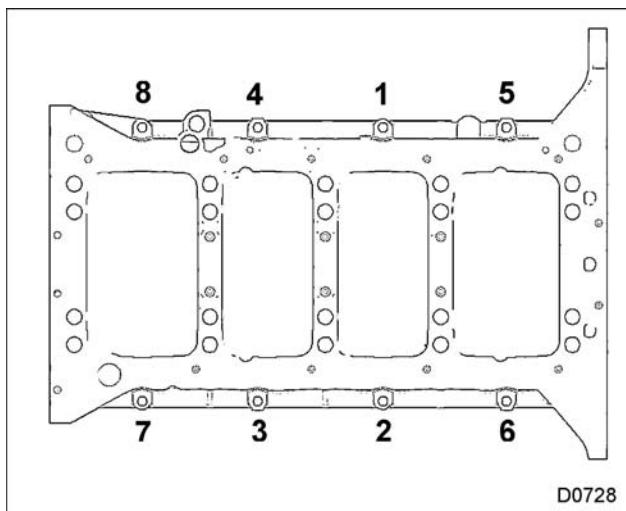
Tightening sequence for lower crankcase outer bolts (standard torque)
